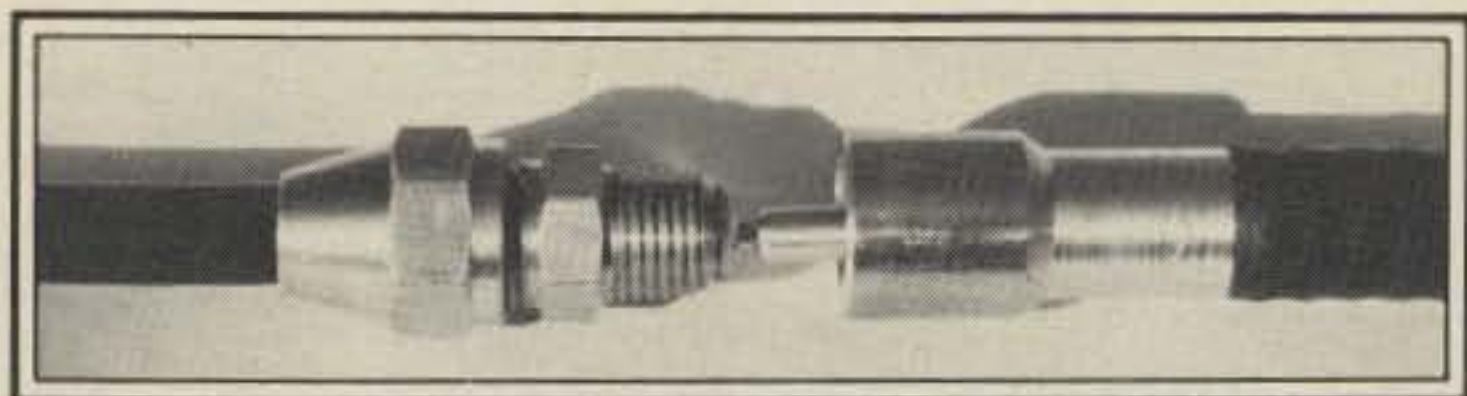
Assembling the Heliax connector. The sleeve is moved forward on the hardline so coax can be soldered to the center connector.
